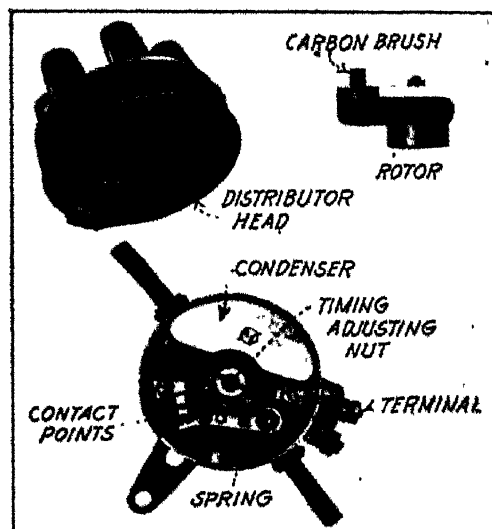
North East breaker-distributor showing distributor head and rotor removed
